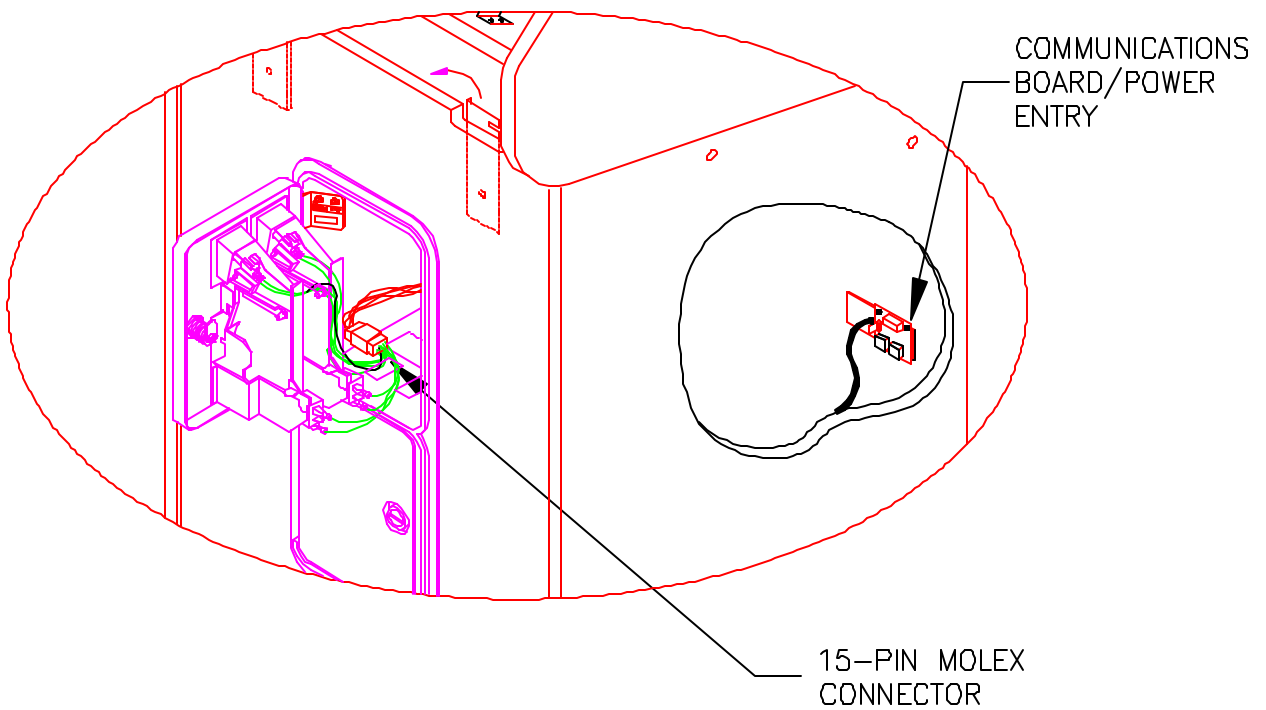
TELCO MOTHERBOARD AND I/O BOARD ASSEMBLY
